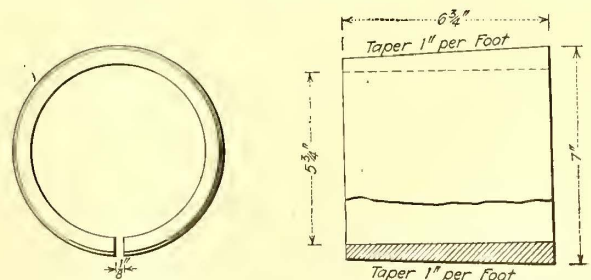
SPLIT BUSHING USED TO CLAMP BEARING INTO THE UNIVERSAL CHUCK
